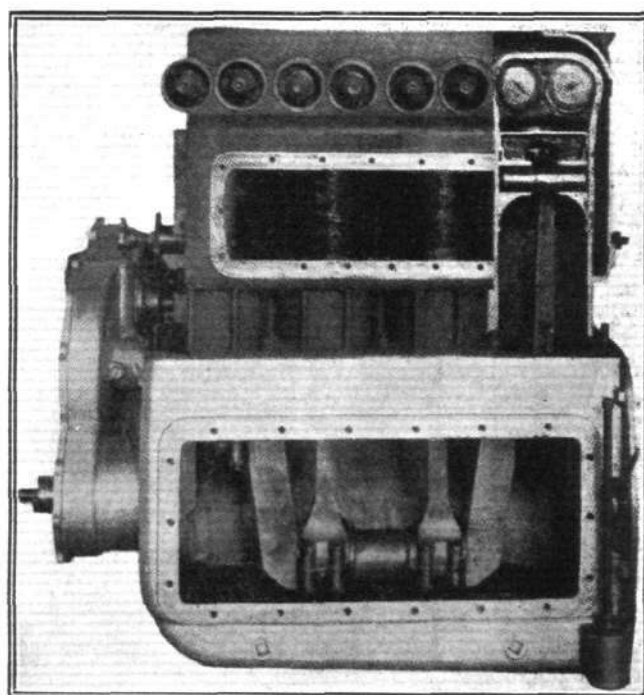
Sectional view of the Duesenberg motor, showing the crankshaft.
